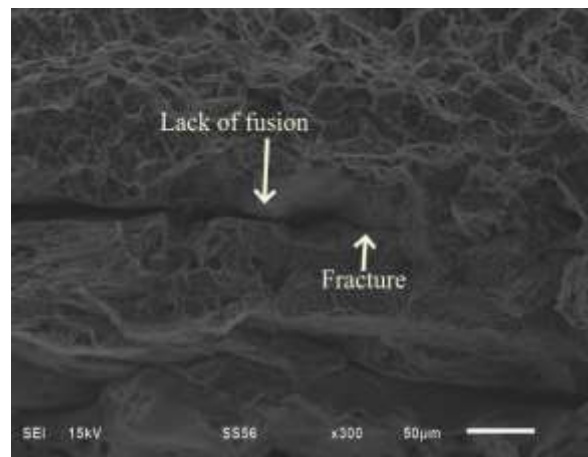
The fracture pattern of the tensile tested CR—Ht sample that failed in the weld metal. The fracture surface has dimples and no fusion.
